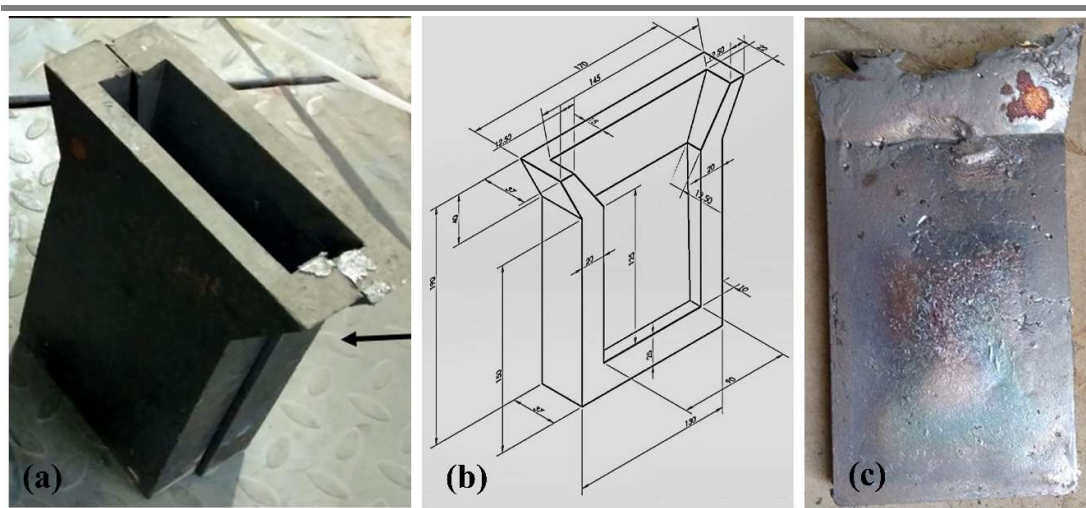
(a) copper mould (b) dimensions of half side of copper mould (c) cast plate.
